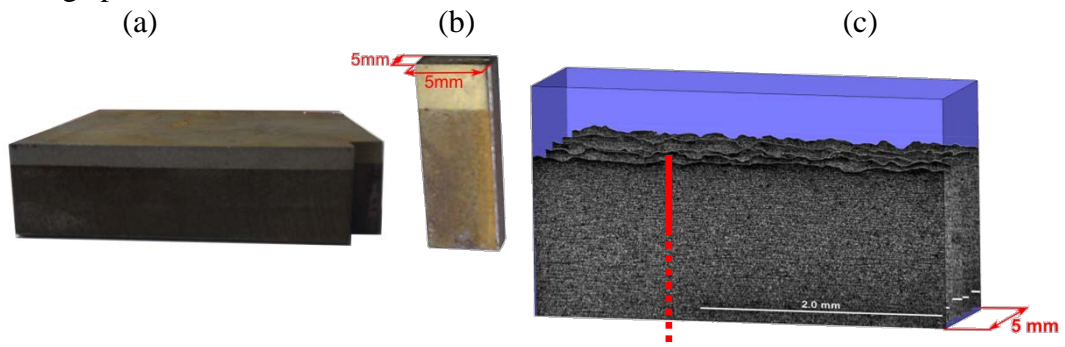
(a) Bimetal consisting of base ferritic steel P355NH at the bottom and 254 SMO clad on top as prepared by explosion welding, (b) sample for synchrotron study, (c) Three-dimensional view (5 cross sections) of the ferritic/austenitic bimetal investigated by micro diffraction. Ferritic steel (gray areas at the bottom) was obtained from crystallographic cuts. For reasons of clarity the austenite parts were removed from pictures. Wavy interface between the two materials is obvious. The red full line represents a shot-by-shot scan along a straight path of length 0.4 mm with a step of width $1 \mu\text{m}$. The scan was continued further down to steel side with a coarser step of 0.1 mm (dashed part of the line).
